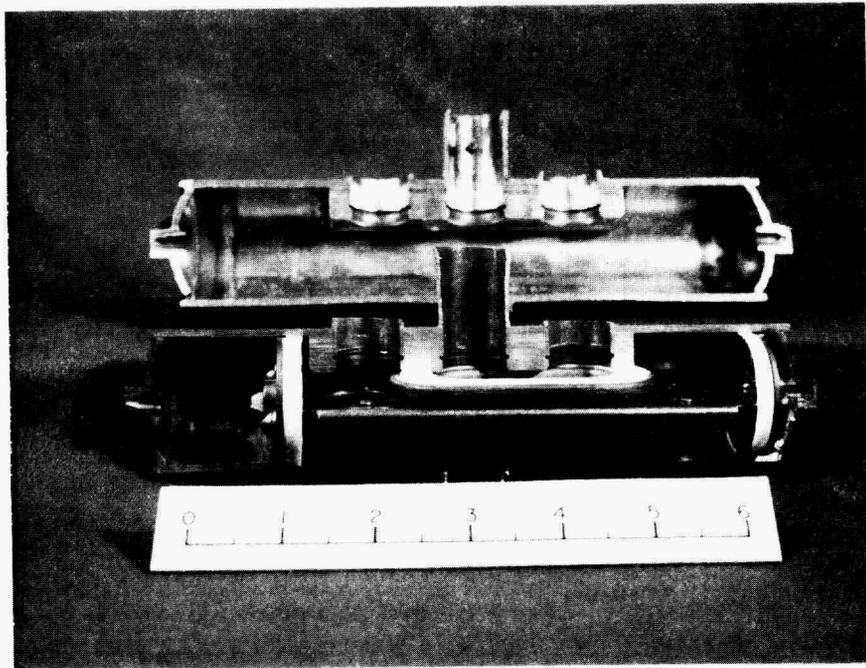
A Photograph of the Ranco V25 Reversing Valve. In the Foreground One Can See the Piston Rings Across Which a Pressure Difference Forces the Return Bend Assembly to Slide. Also Shown is The Return Bend Sealing Surface Pressing Against the Valve Body.
